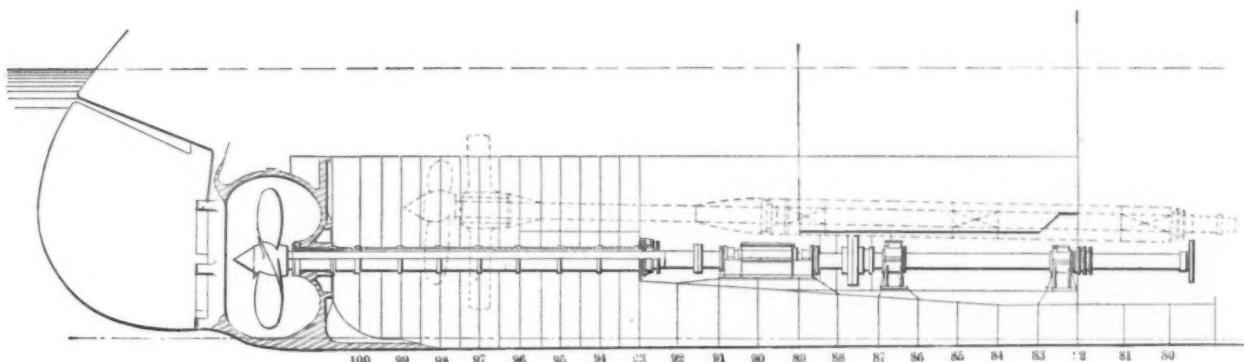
LONGITUDINAL CENTRAL SECTION OF STERN.
